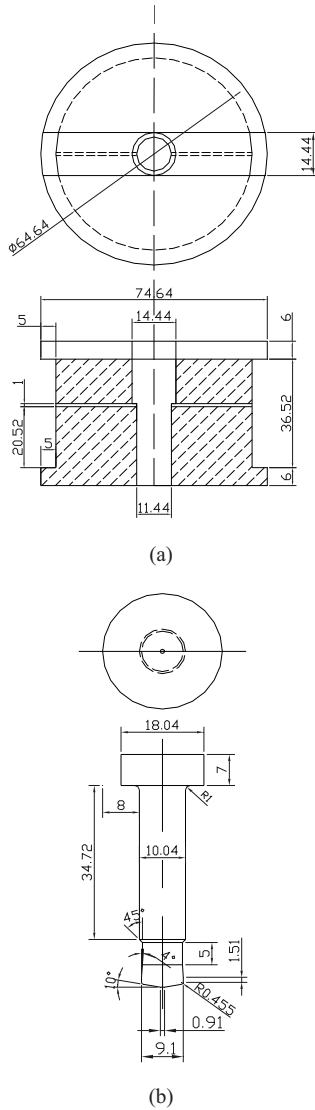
Dimension of (a) lower die (container) and (b) punch used in the downsized test in mm.
